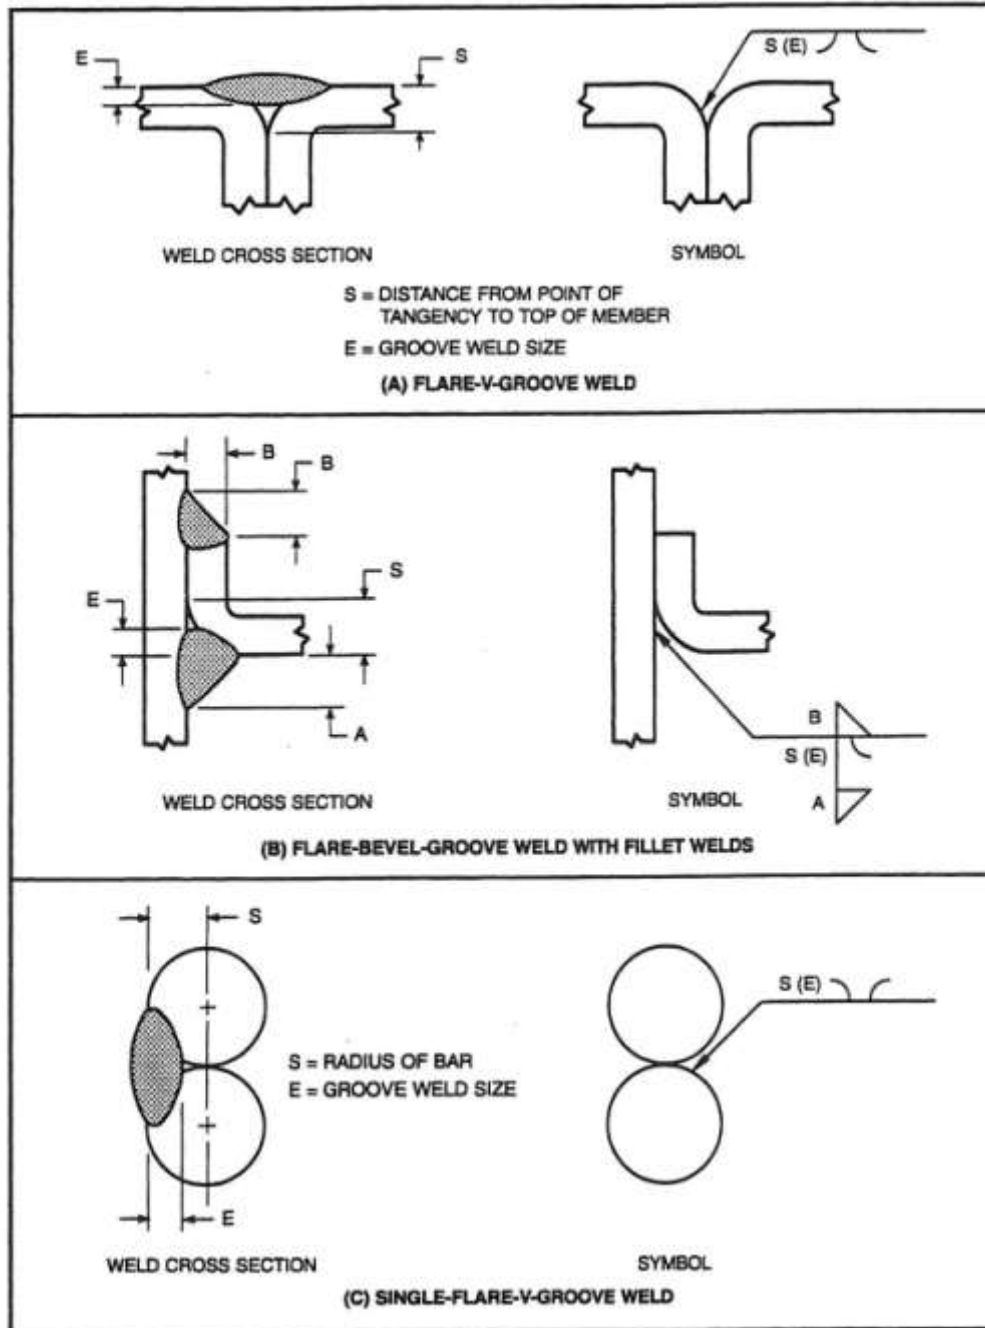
Applications of Flare-Bevel and Flare-V-Groove Weld Symbol-2
